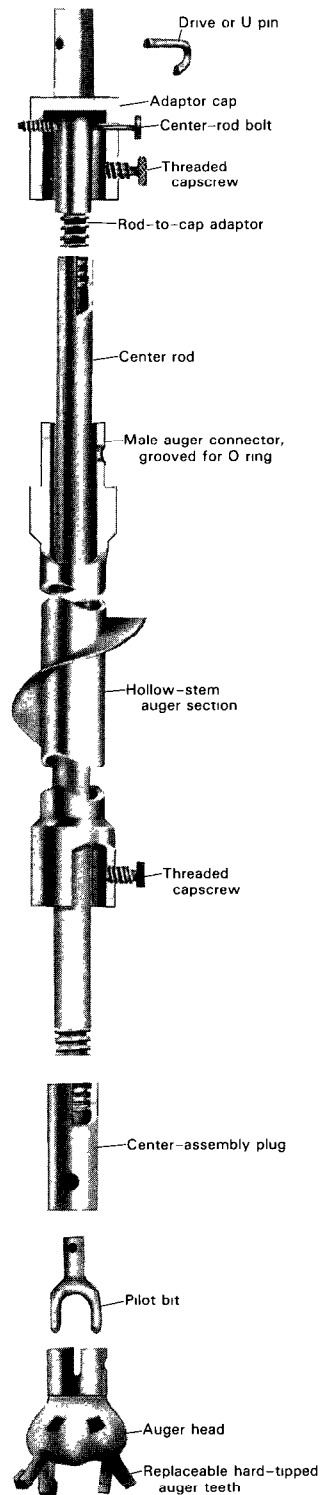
Hollow-stem auger section with center-rod assembly and accessory components.
